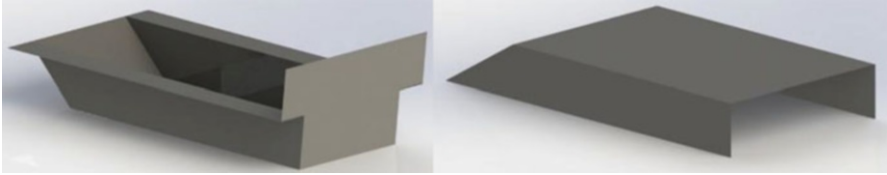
Parts of the hull. Left: lower hull. Right: upper hull
